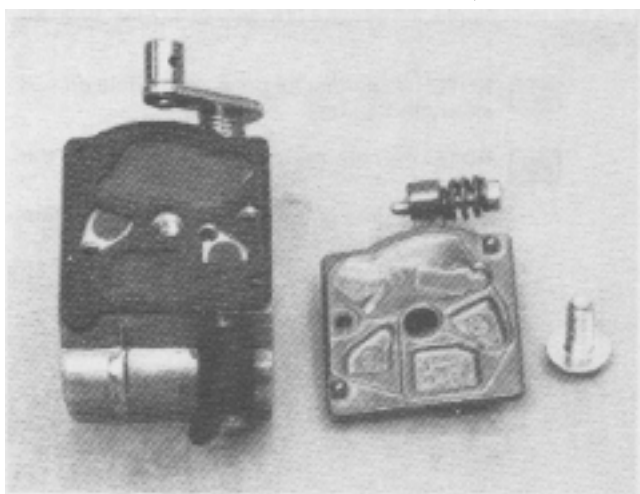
Assemble the pump diaphragm and gasket on carburetor body making sure there are no wrinkles.
